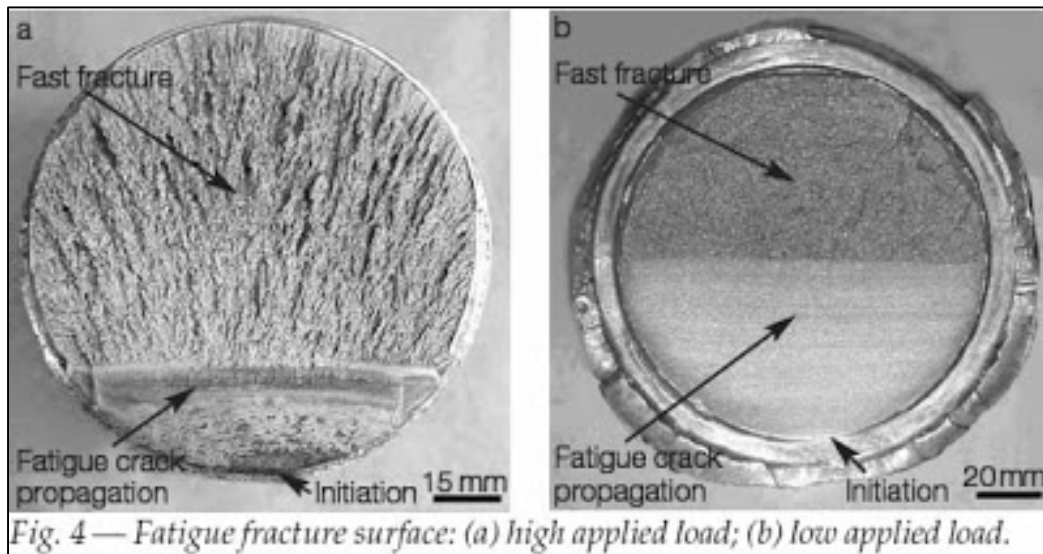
Fatigue Fracture of bolts with beach marks visible in fatigue region (Milan et al. 2004)
